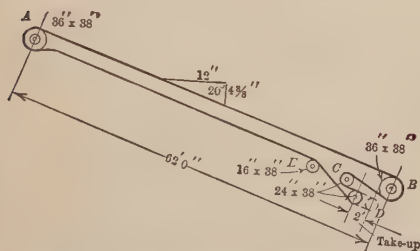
Conveyor with Deflector Pulleys too Small in Diameter.
